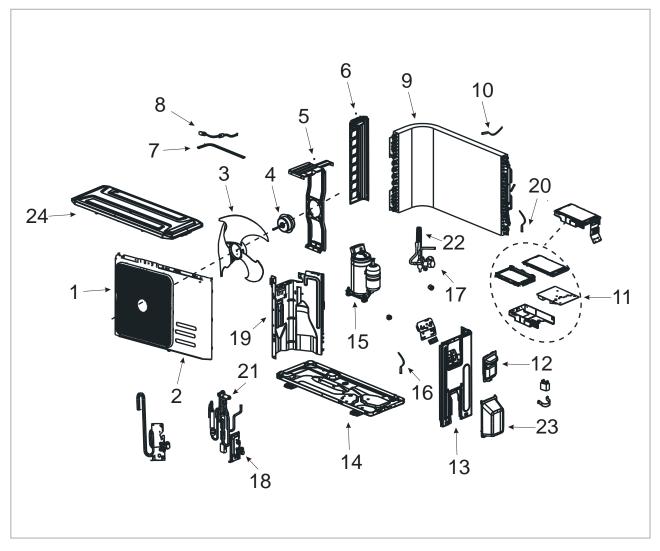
Exploded view of the unit RVT 264-354 DC AT
